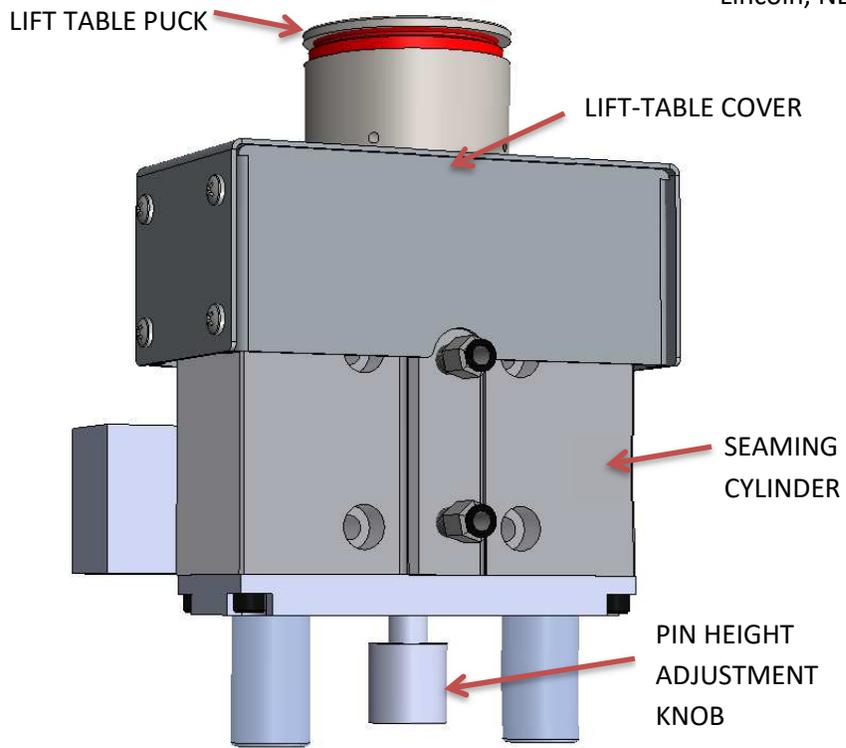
Lift Table Assembly. The lift-table puck height (pin gauge height) can be adjusted by loosening or tightening the adjustment knob.
